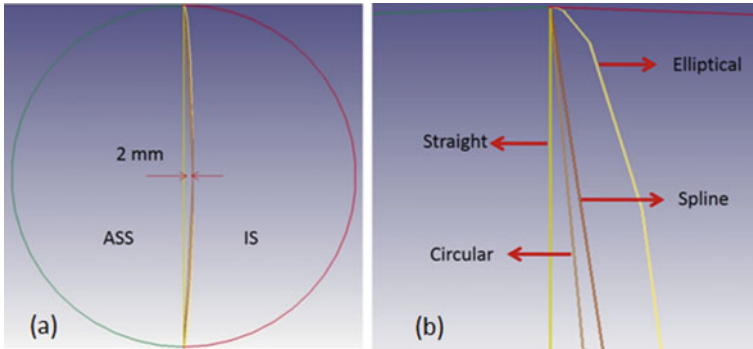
a Curvilinear weld profiles in a TWB b enlarged view of the profile shape
